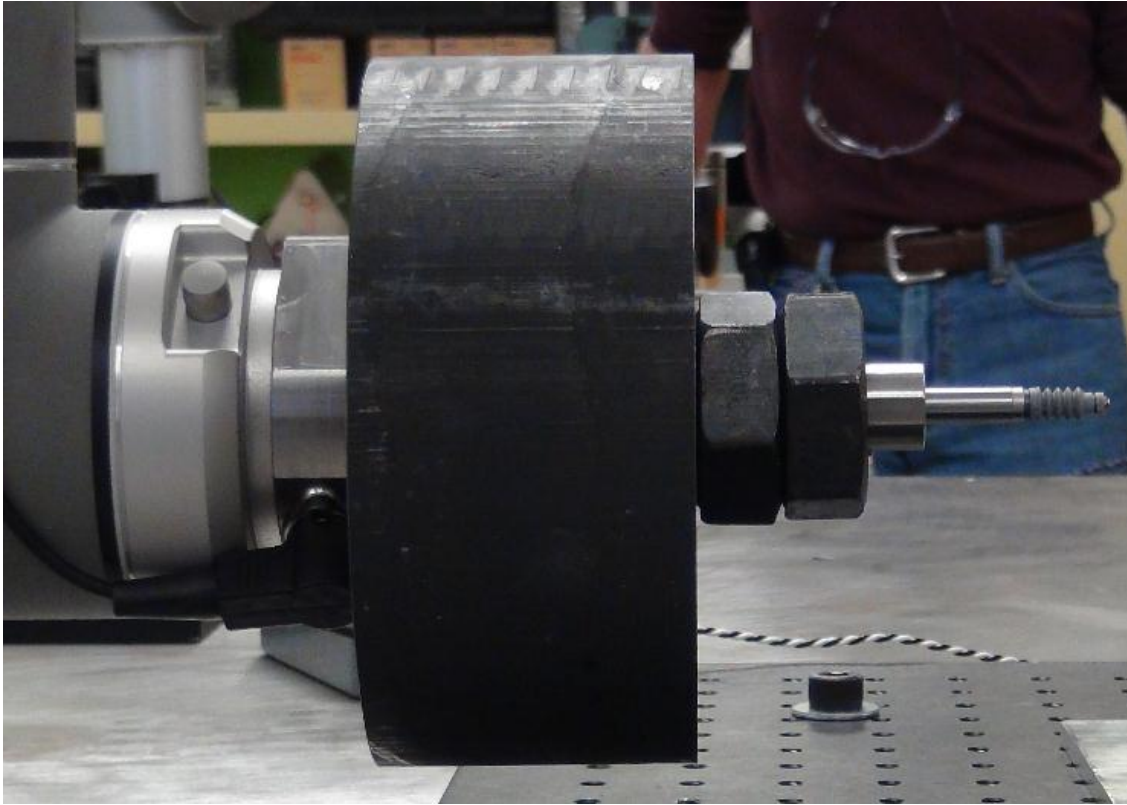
Fixture with 10 kg payload mounted to the UR10.
